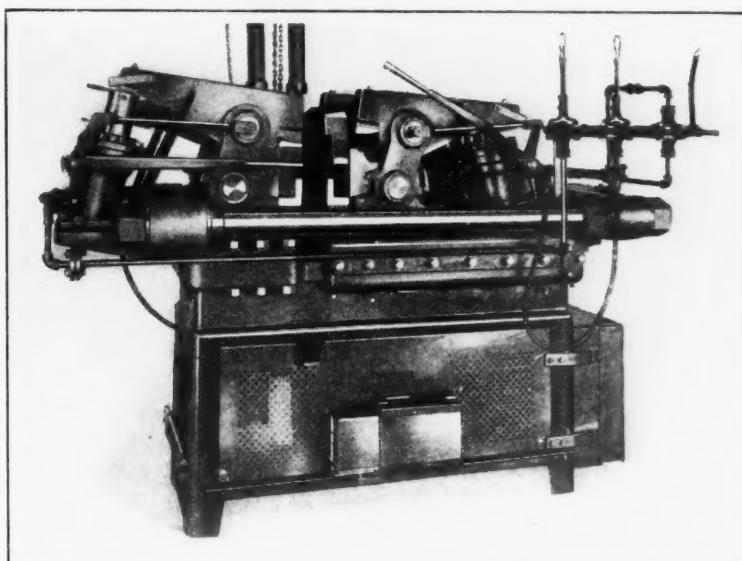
Thomson Butt-welding Machine for Small-diameter Wide Rings, such as Motor Frames
